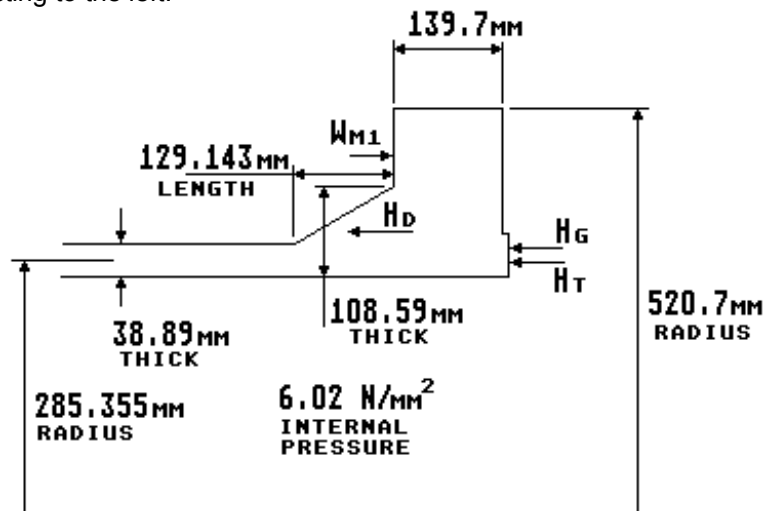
(a) 24 inch class 900 taper hub flange
